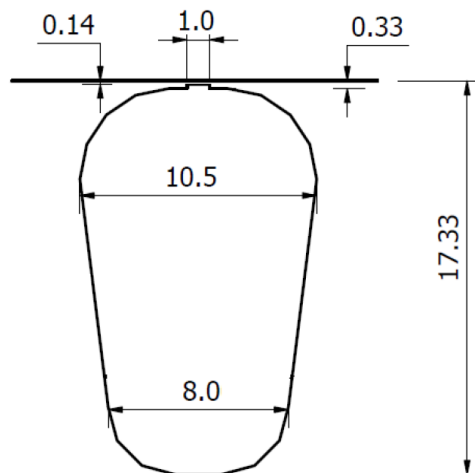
Rotor slot dimensions of the designed AFIM.
